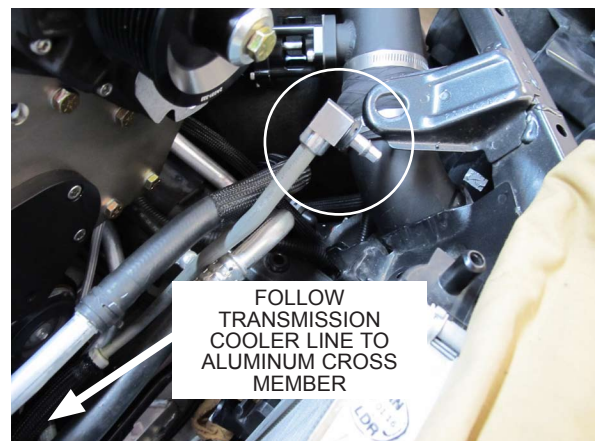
x: Detach Driver Side Transmission Cooler Line
